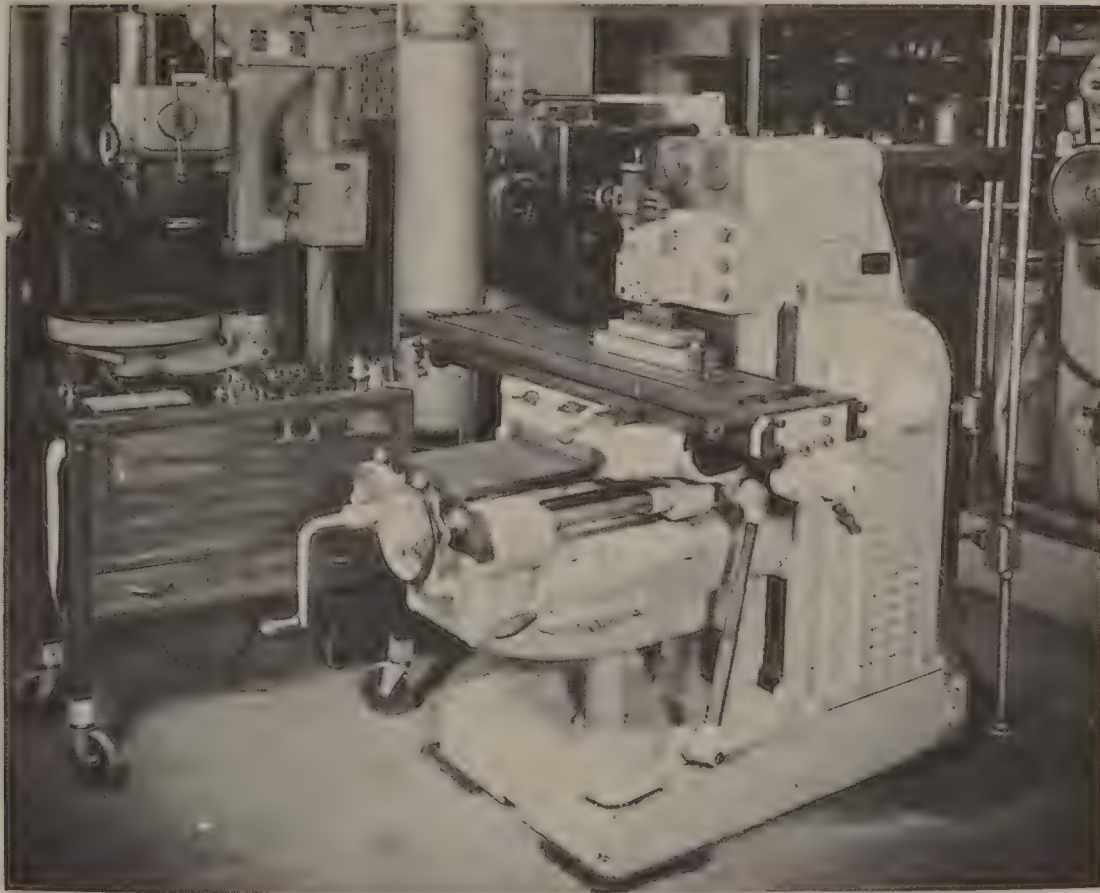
General view of low speed cutting apparatus showing two channel strain recorder on left and milling machine in foreground.
